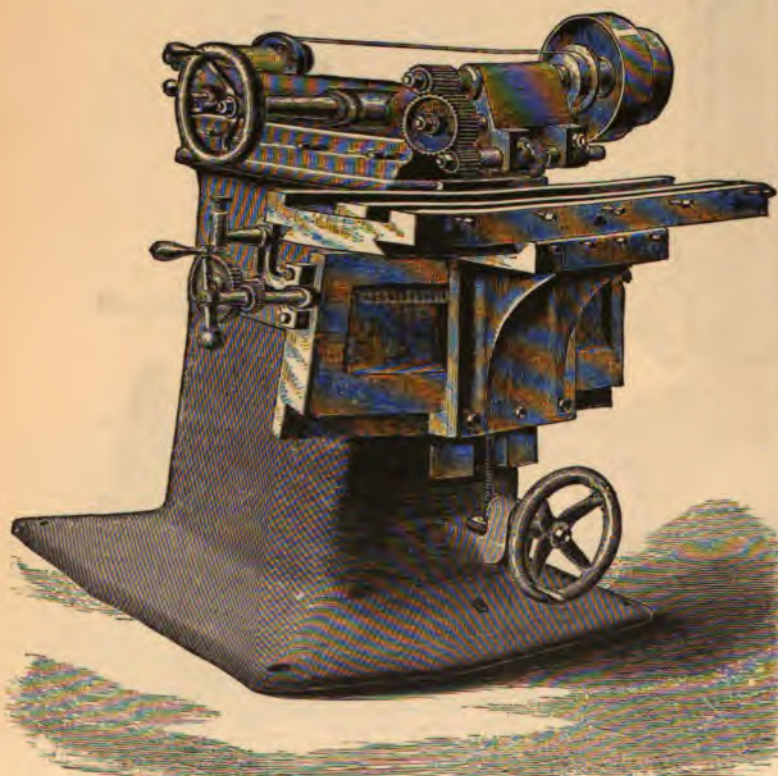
The Pratt & Whitney rack-cutting machine.
